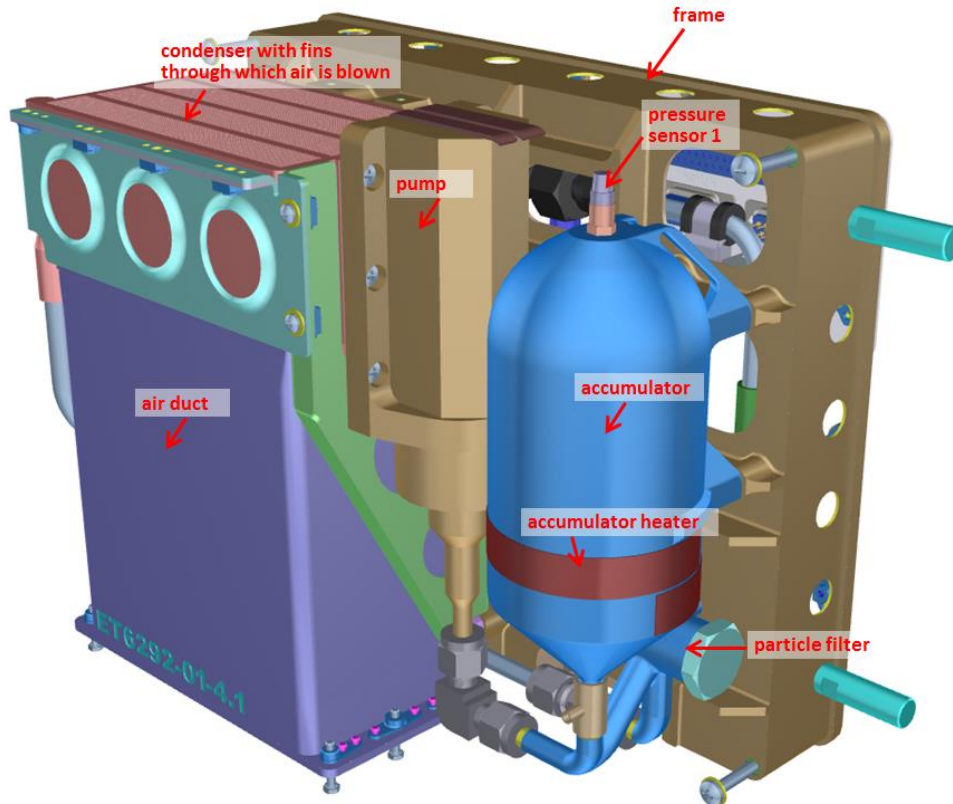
CAD drawing of the TOPMOST cooling system (without cover)
